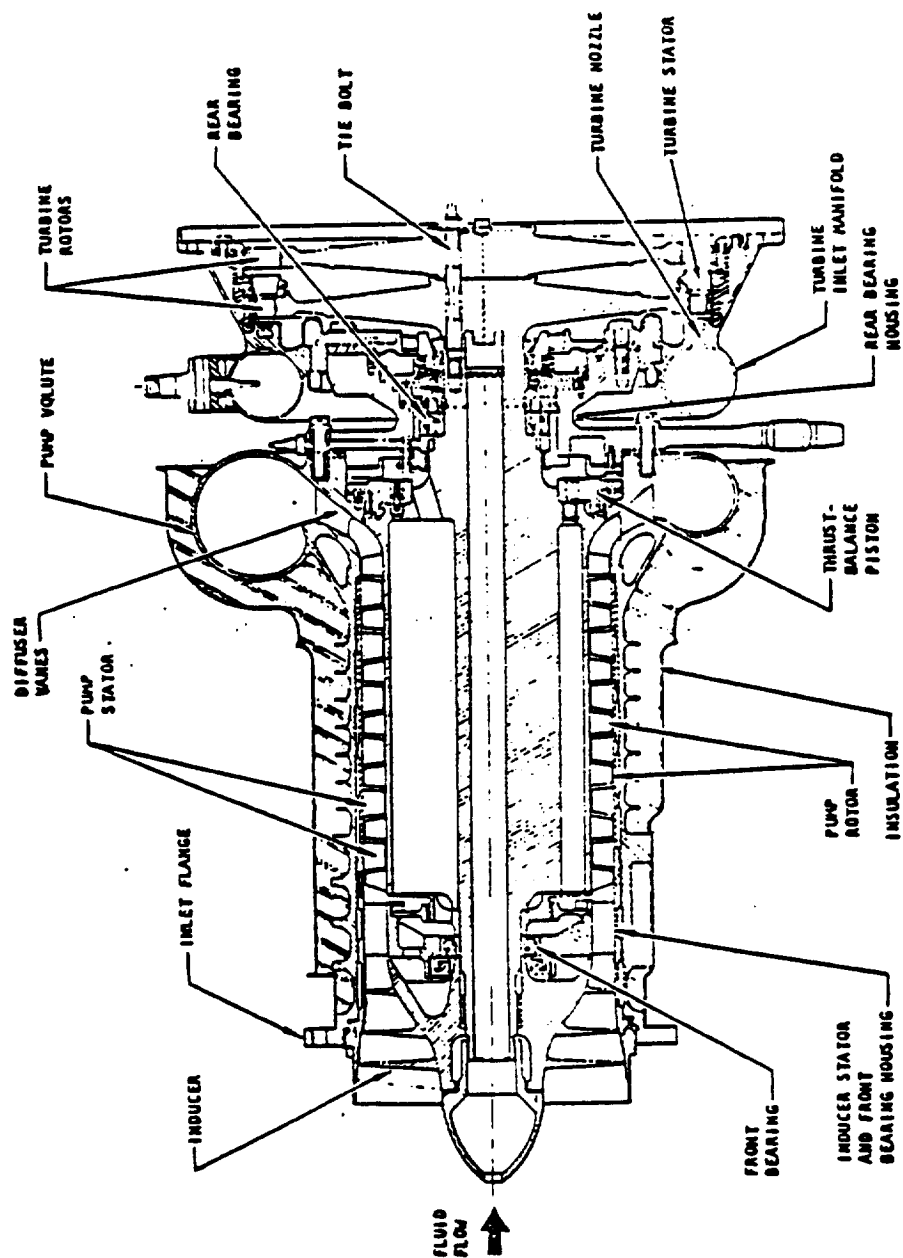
Cross-Sectional View of Mark 15-F Turbopump
